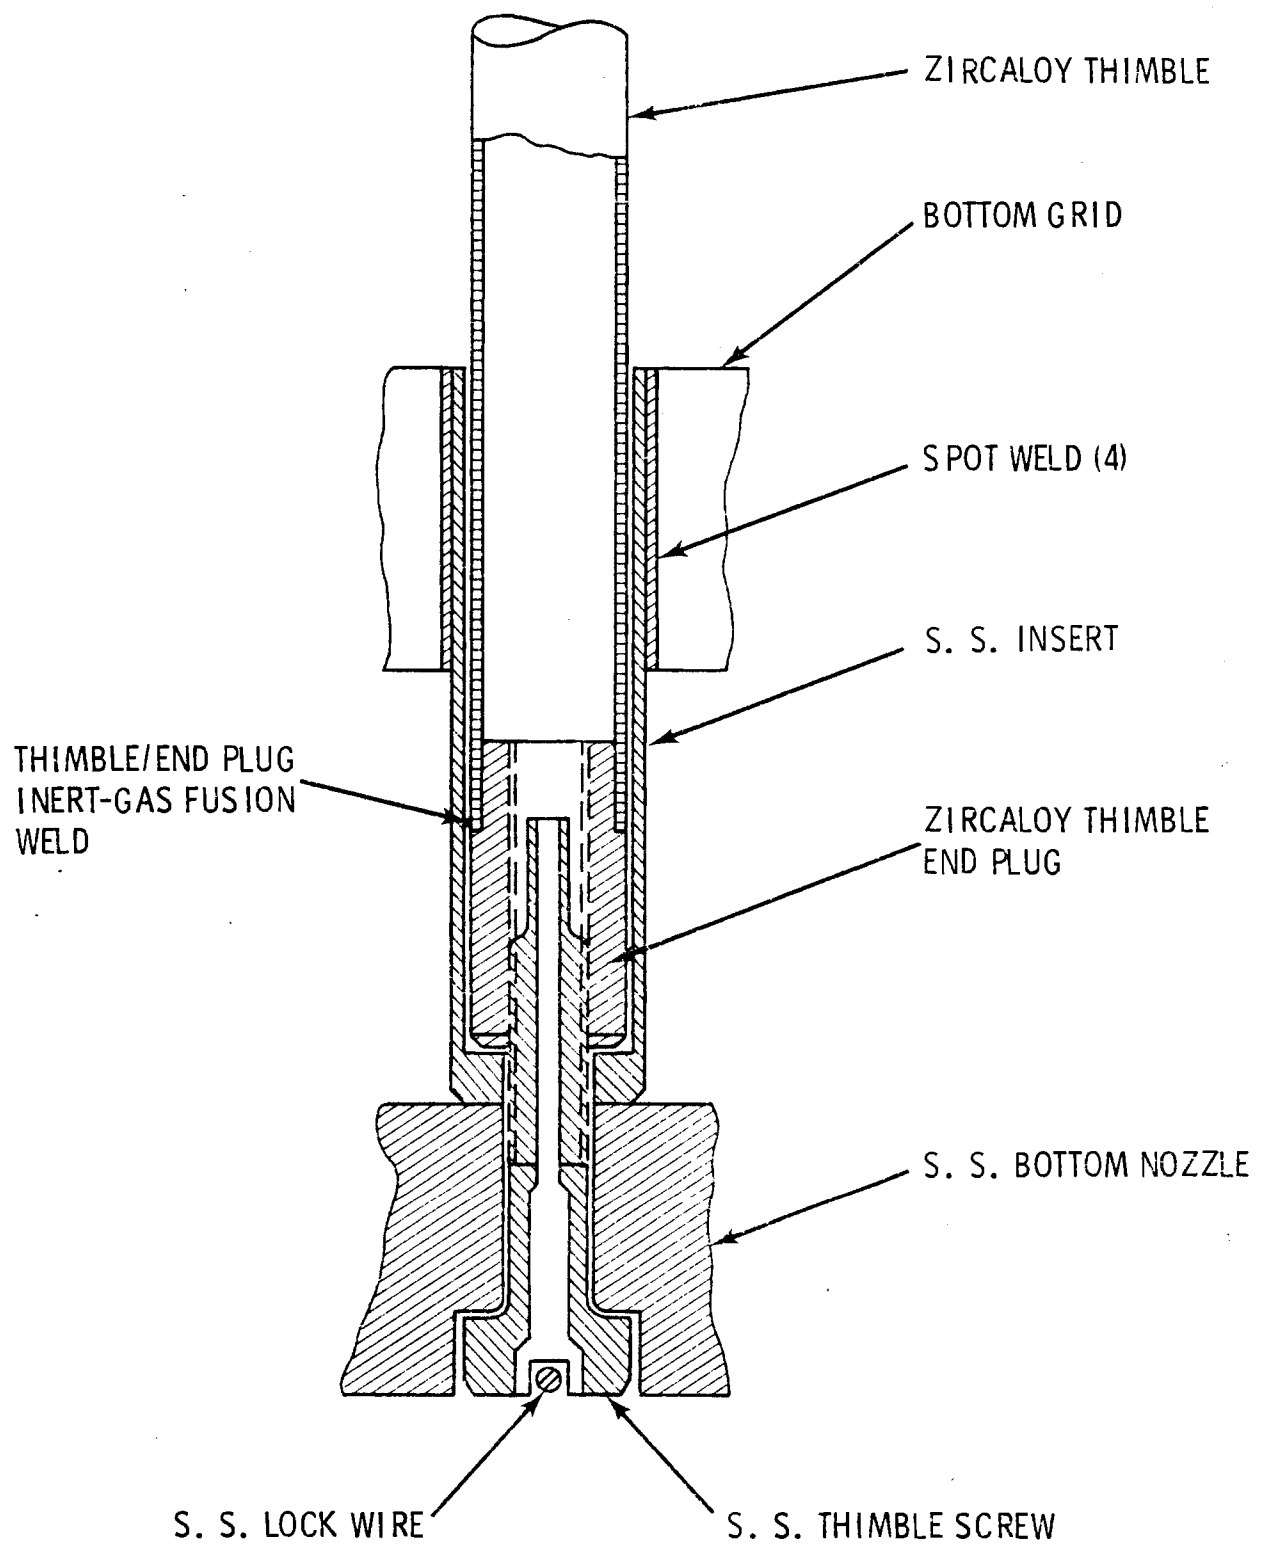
Guide Thimble to Bottom Nozzle Joint
